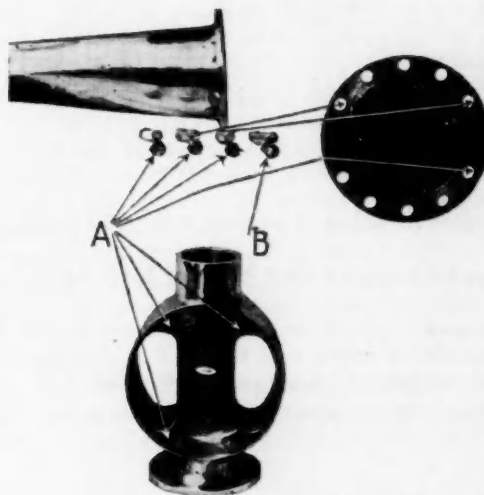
HUB PARTS OF STEEL PROPELLER AFTER FAILURE, BOTH BLADES UNINJURED
